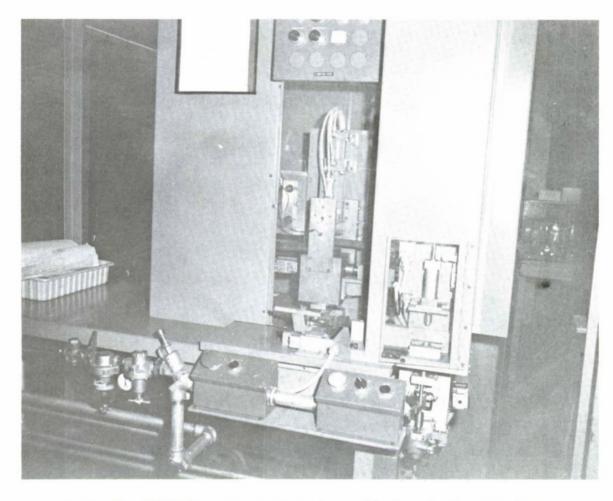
M550 Fuze Escapement Assembly Sample Test Machine
